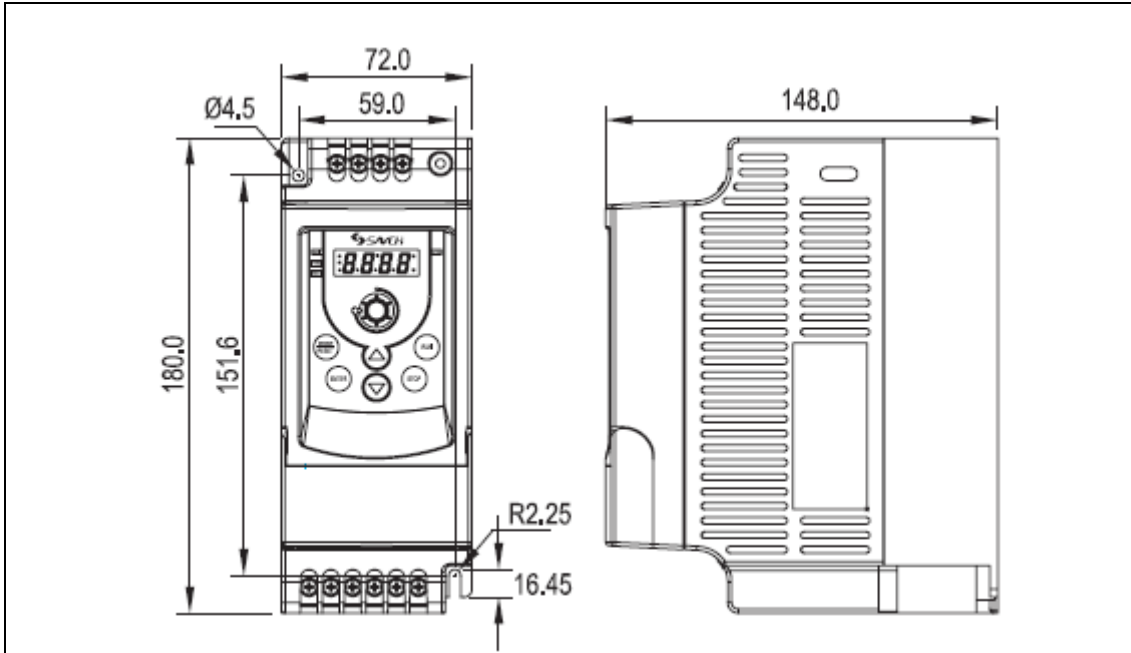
Dimension and installation size of S900-2S0.2G~0.75G/S900-4T0.4G -1.5G (unit: mm)
